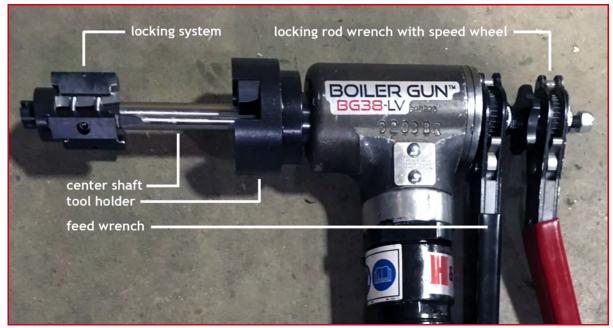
BG38 BOILER GUN MAIN COMPONENTS
